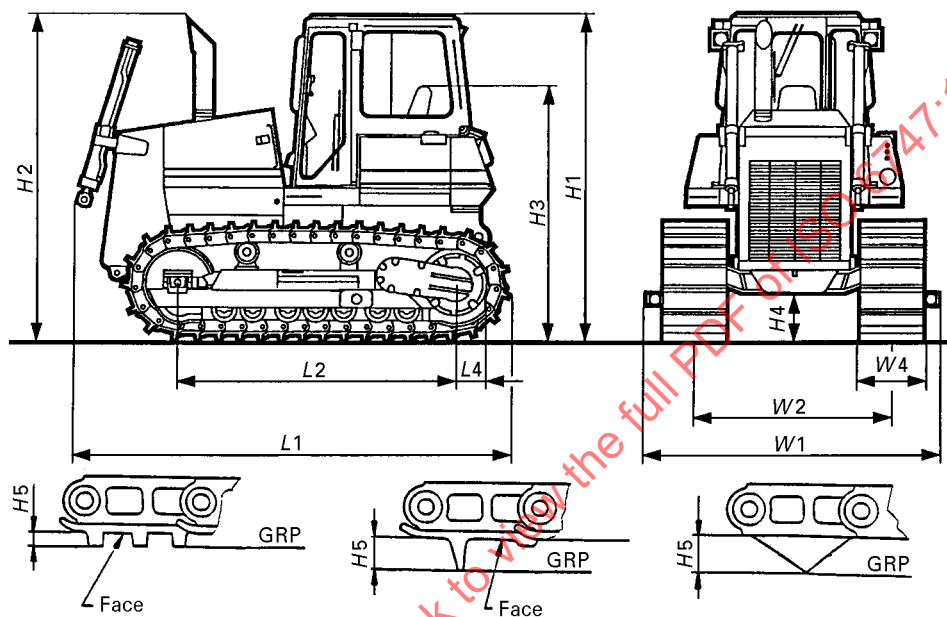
Dimensions of base machine (crawler tractor-dozer)
